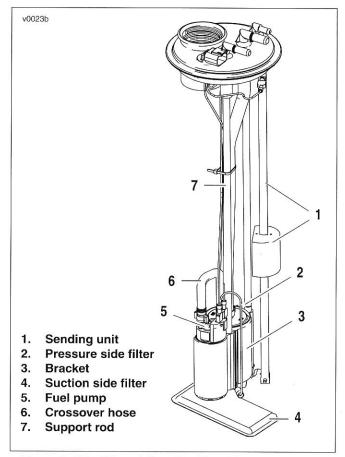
Fuel Pump/Filters/Fuel Level Sender Assembly
